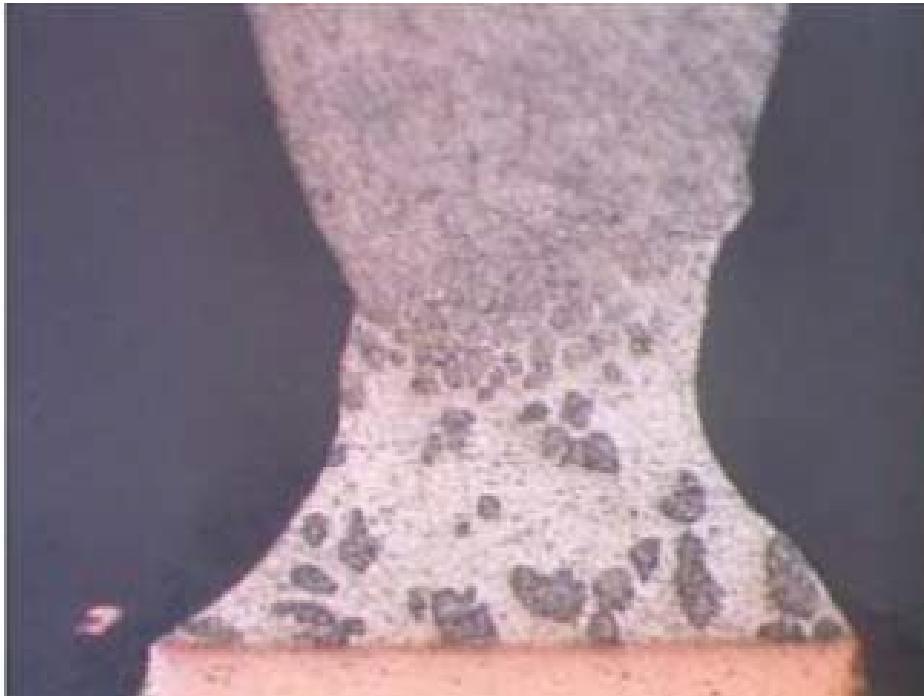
Microsection of CGA mounted on PCB showing minimum solder: Acceptable
